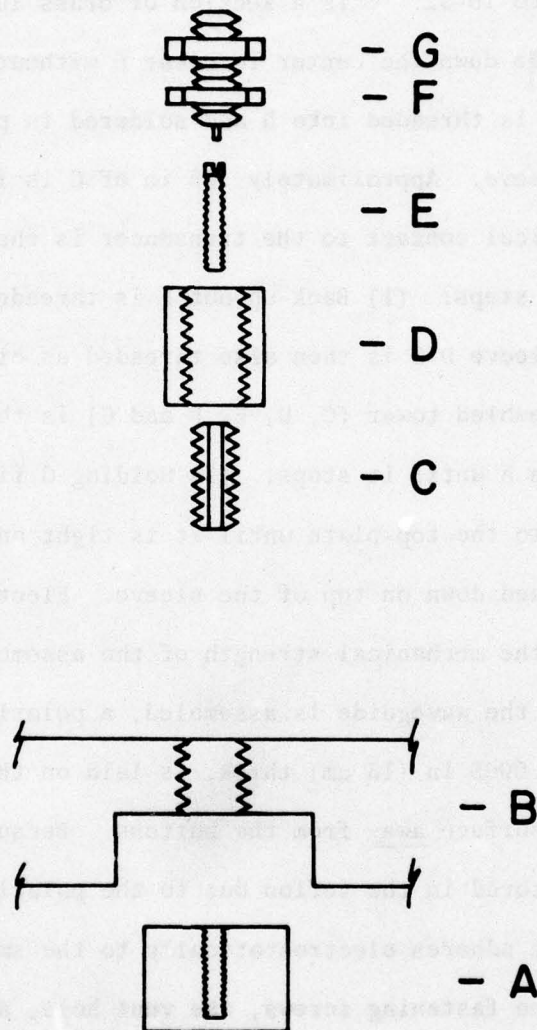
Exploded view of transducer "button" (A, B) and electrical "tower" (C, D, E, F, G) used to make electrical contact to pick-up transducer.
